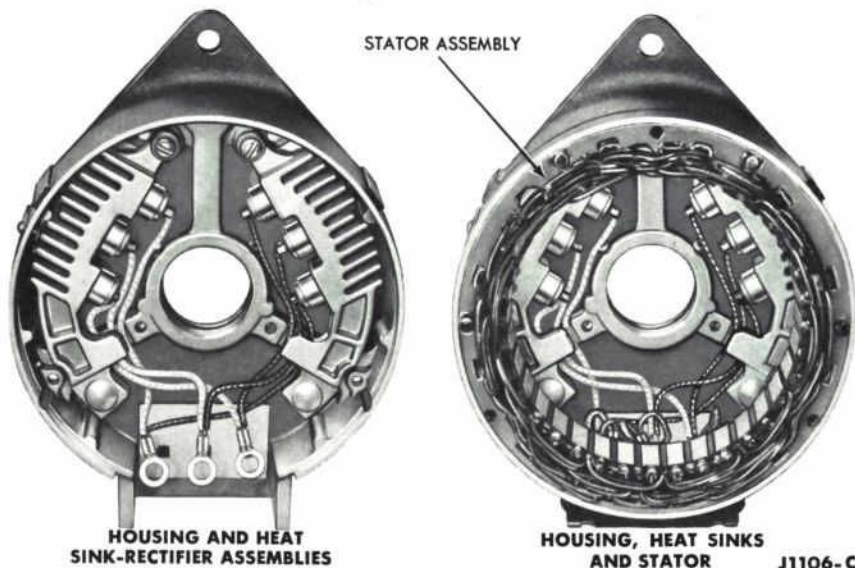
Car 60 Ampere Slip-Ring End Housing, Rectifier, and Stator Assembly
